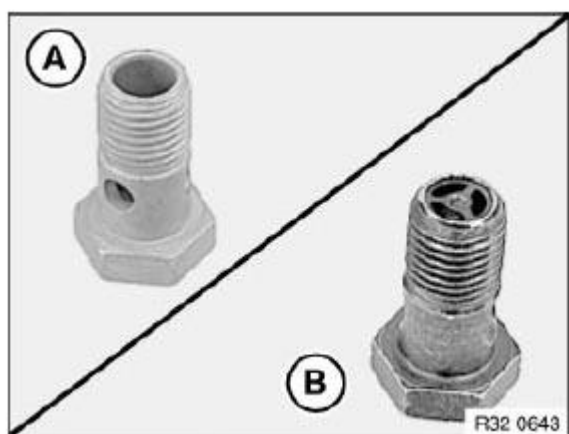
Identifying Banjo Bolt With Non-Return Valve
